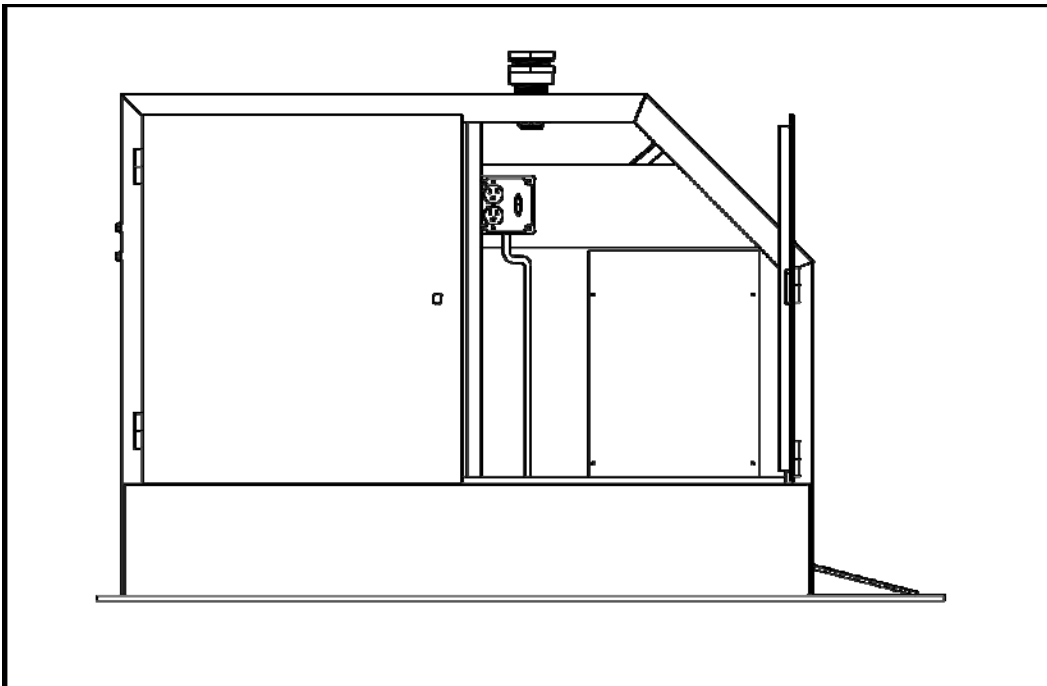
Location of Flexible Conduit Installation to AC Junction Box, Control Cabinet
